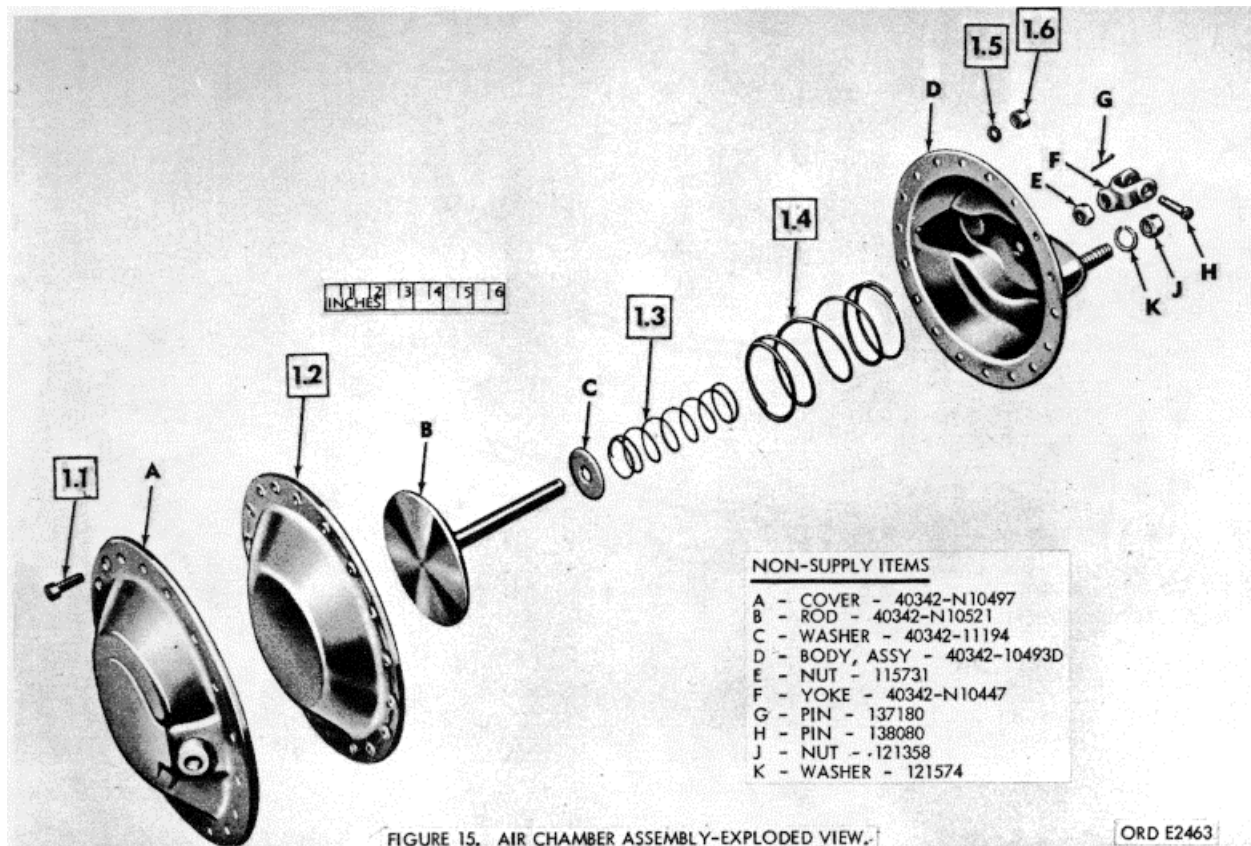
AIR CHAMBER ASSEMBLY-EXPLODED VIEW
